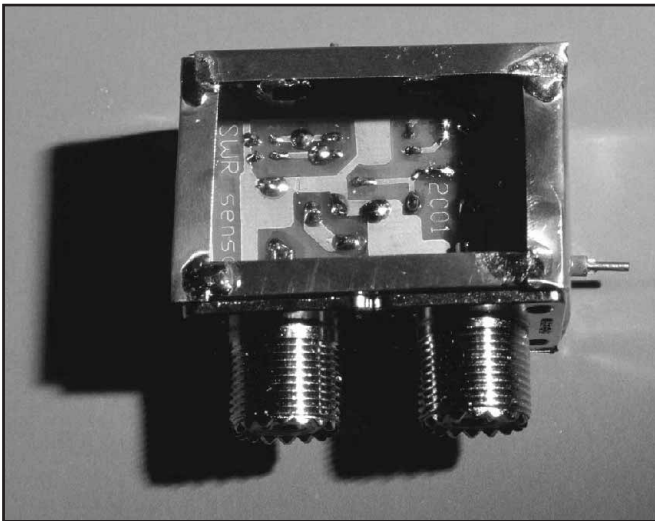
The solder side of the SWR-sensor board, showing how the SO-239 connectors are mounted.
